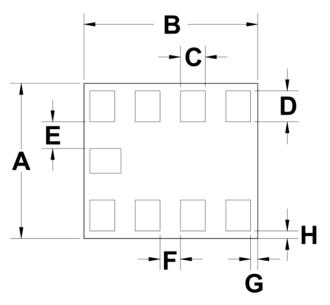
OLGA-2.8 x 2.5 x 0.6-9N Package dimensions (bottom view).
